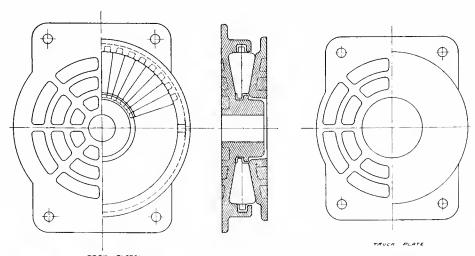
General Arrangement of 12 in. Roller Center Plate. Edwin S. Woods & Company.
